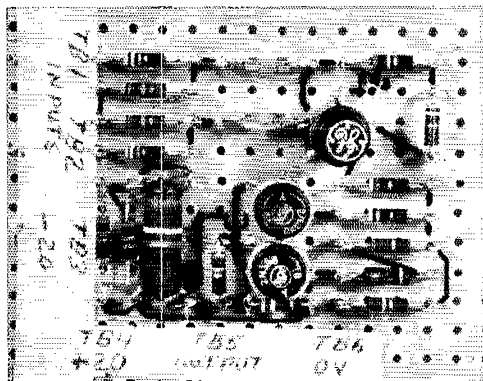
Physical layout of components using the circuit of Fig. 1.
